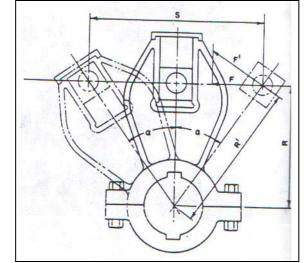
Force diagram for a Rapson-slide type steering gear.
